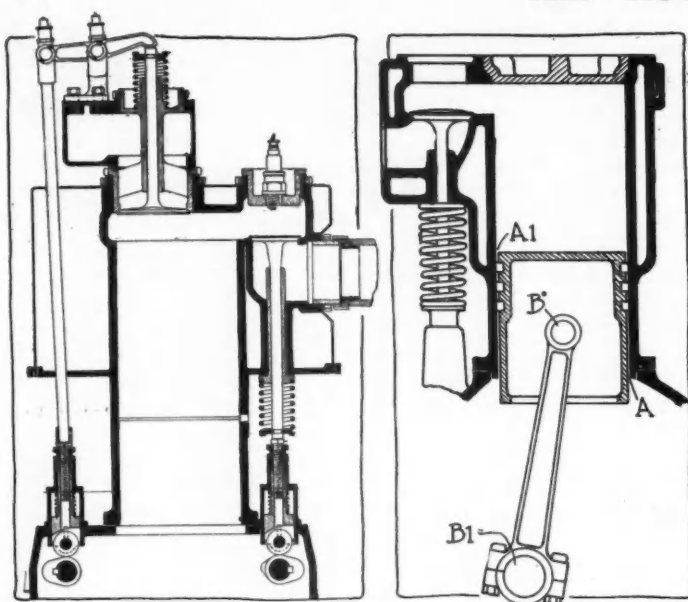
Left, Sectional view through Chadwick motor. Right, Points of wear on a piston
